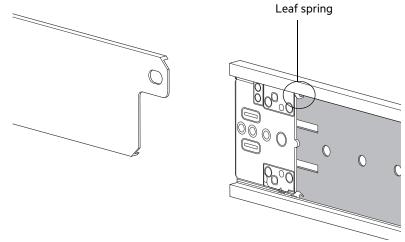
Leaf spring latch engaged, extension of mid rail to fully forward and locked position
